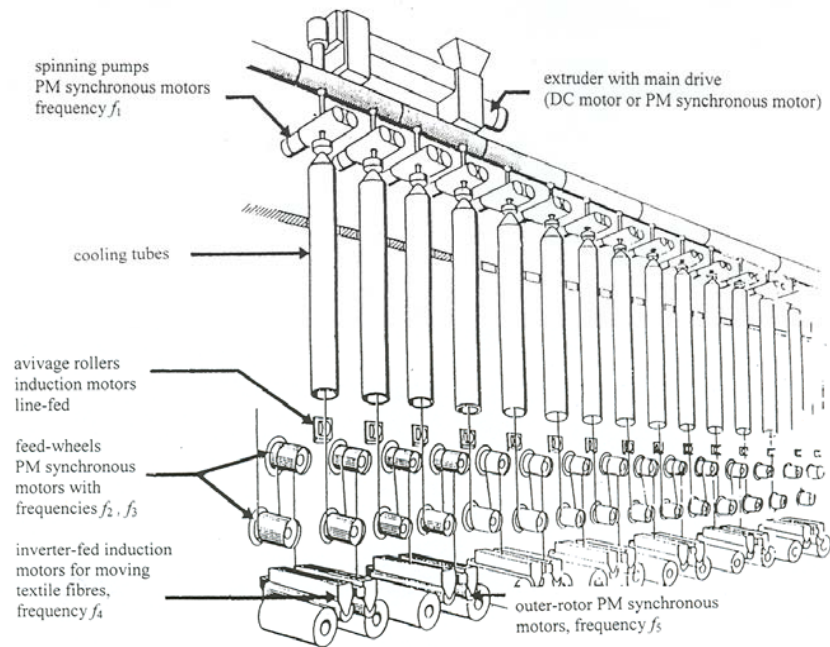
PM synchronous motor group drives for synthetic thread fabrication (Siemens AG)
